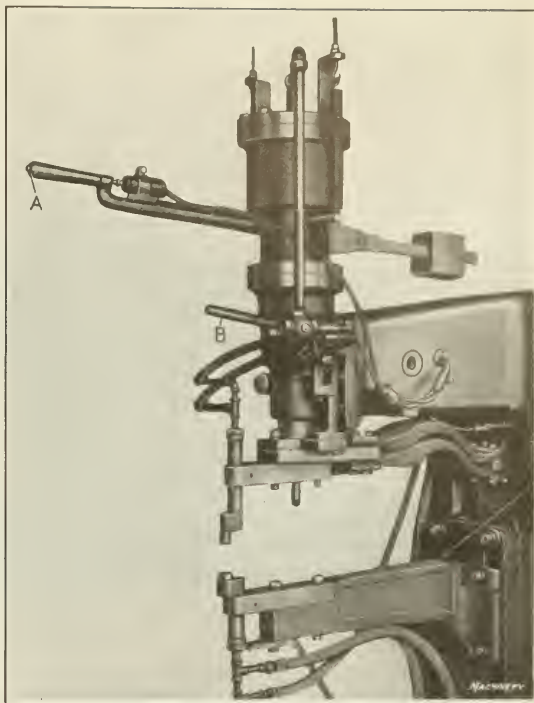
Toledo No. 140 Type Electric Welding Machine fitted with Air Cylinder for Electric Riveting
